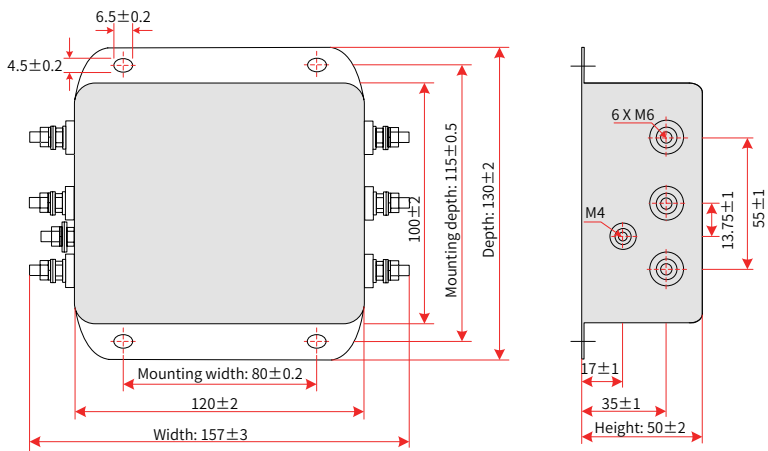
Mounting dimensions of the simple EMC filter (unit: mm)
